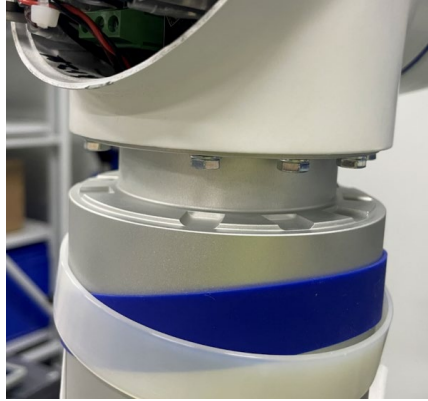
Remove the upper arm rubber ring and supporting ring
